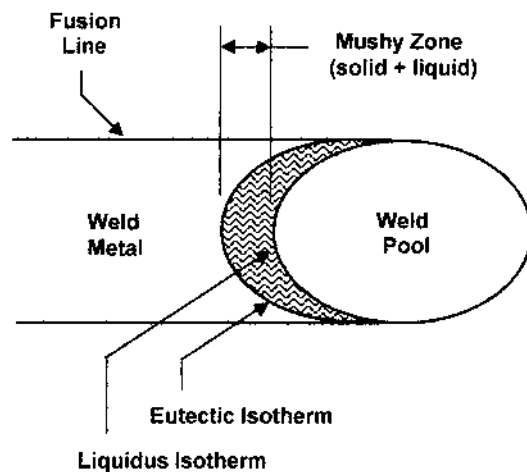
Top view of weld showing two-phase (liquid + solid) mushy zone which trails behind the weld pool.
